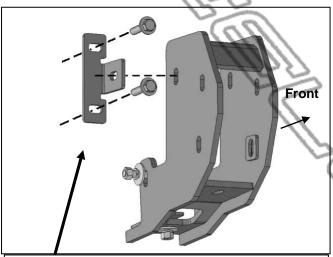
Remove outer bumper supports attached to frame and ends of the bumper. Remove bumper bolts (arrows) to remove bumper (driver side pictured from above).
